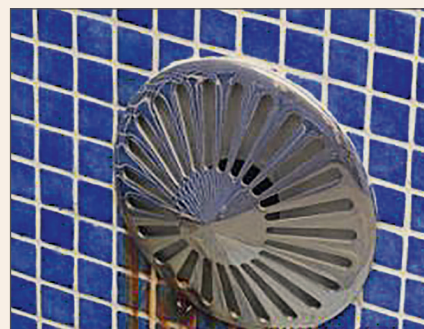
Corrosion on stainless steel spa pool aerator jet cover
